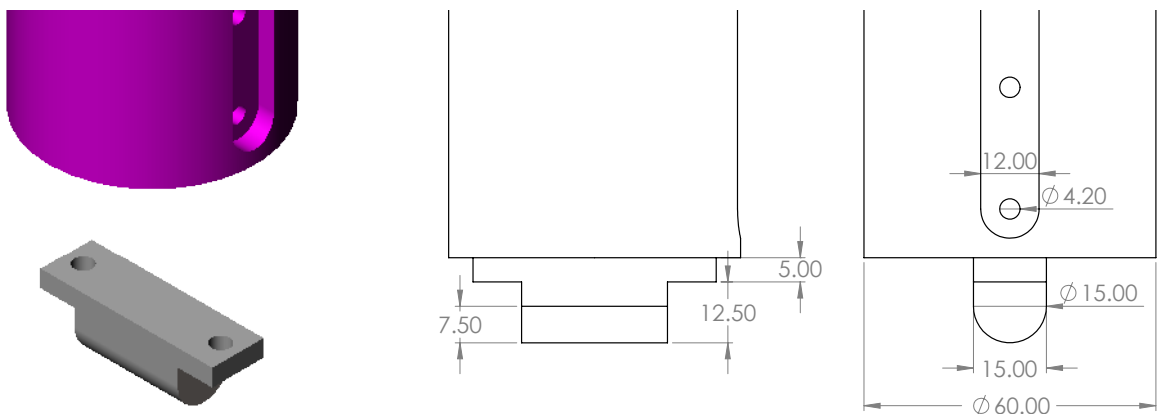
Technical drawing of the impactor including basic dimensions.
